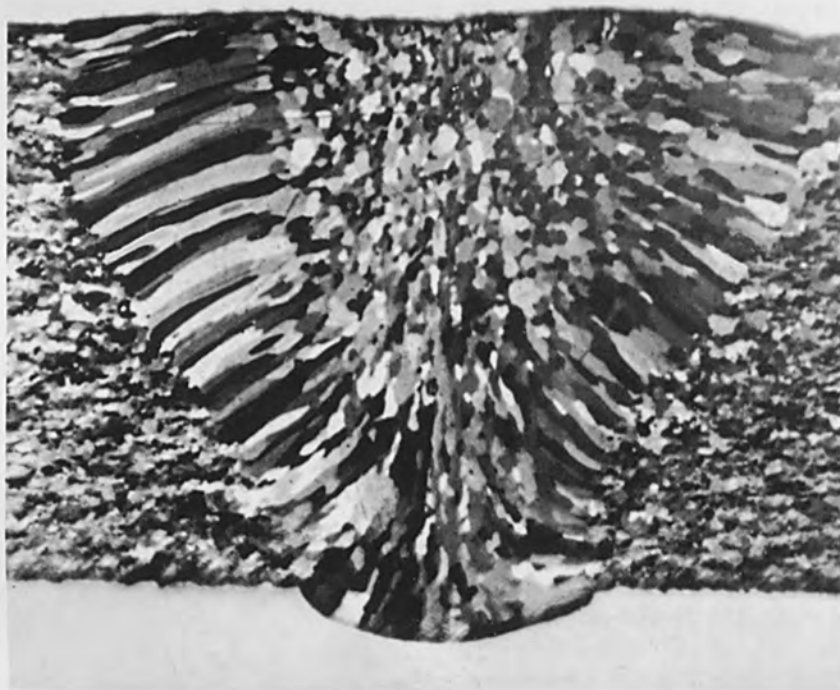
Weld Cross-section in 0.040-in. Beryllium
